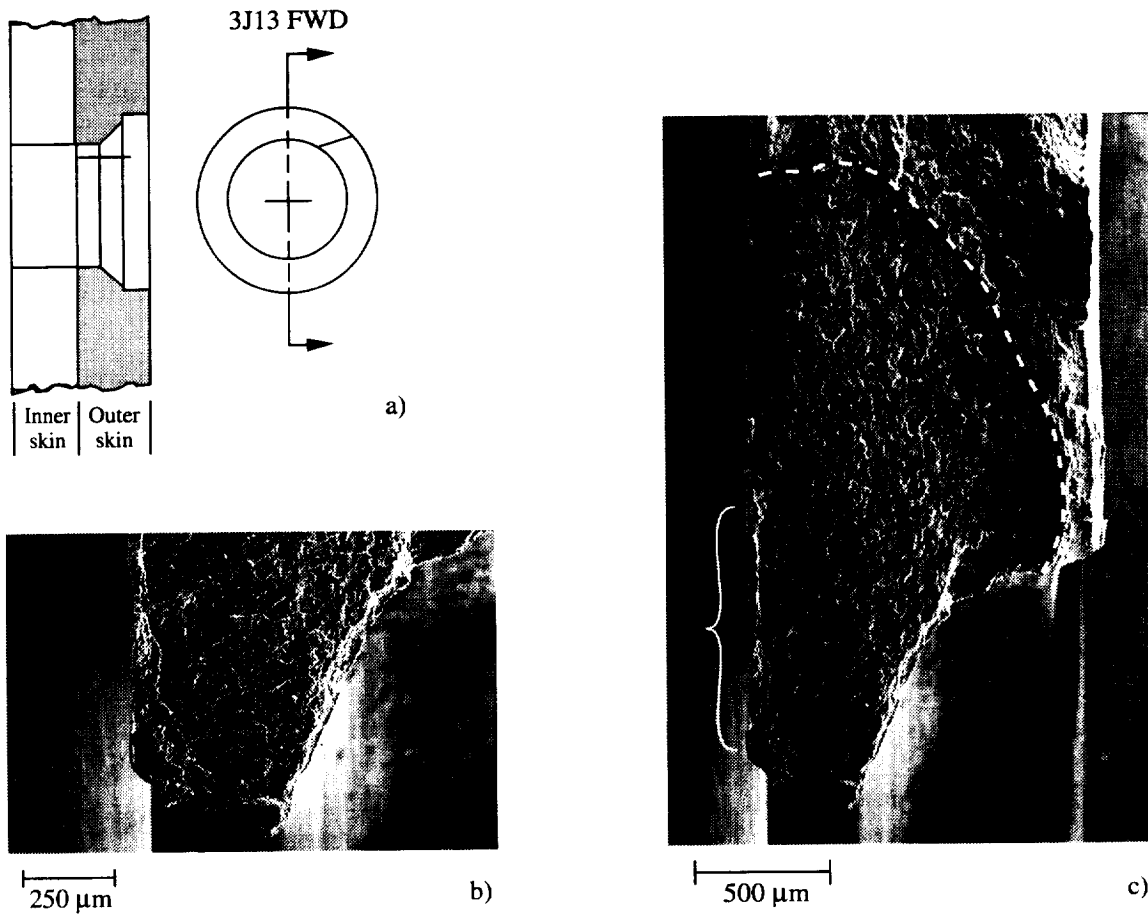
a) The schematic shows the rivet hole 3J13 configuration and the location of the outer skin fatigue crack oriented in the forward direction and about the 1 o'clock position. b) The SEM micrograph shows the fatigue crack surface at the rivet hole shank region c) The SEM micrograph shows the fatigue crack fracture surface extending from the rivet hole (bottom). The bracket marks the likely region of crack initiation along the faying surface and the dashed line marks the fatigue crack front.
